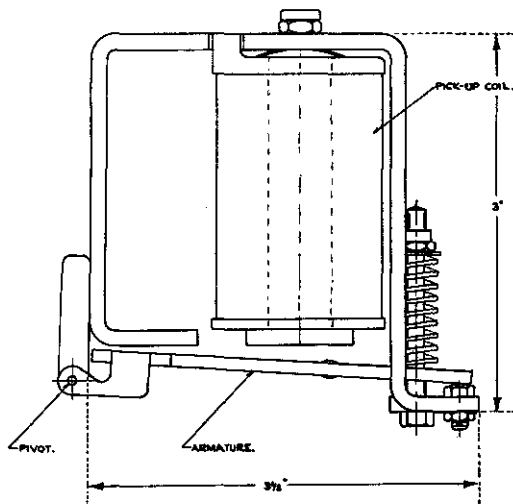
Drawing of iron circuit of PNI relay (side view)
